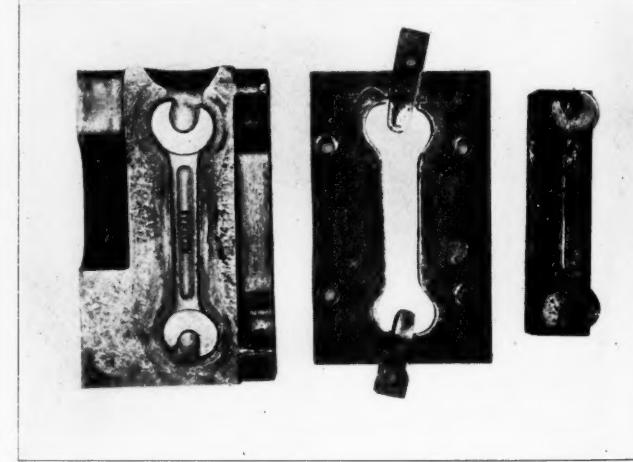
Drop Forging Die for Wrench and Trimming Die for Same.
